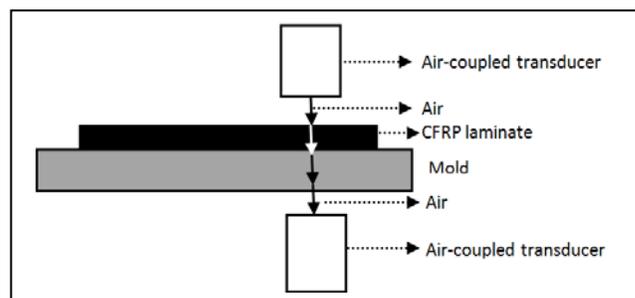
Proposed configuration for the non-contact inspection of lay-up laminate of CFRP composite on the fabrication mold using a through transmission technique and air-coupled piezoelectric transducers.
